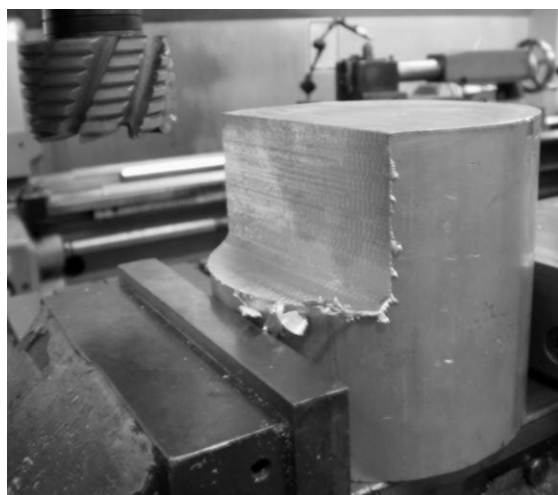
Cutting of the AlMgSi1 ingot on a milling machine
